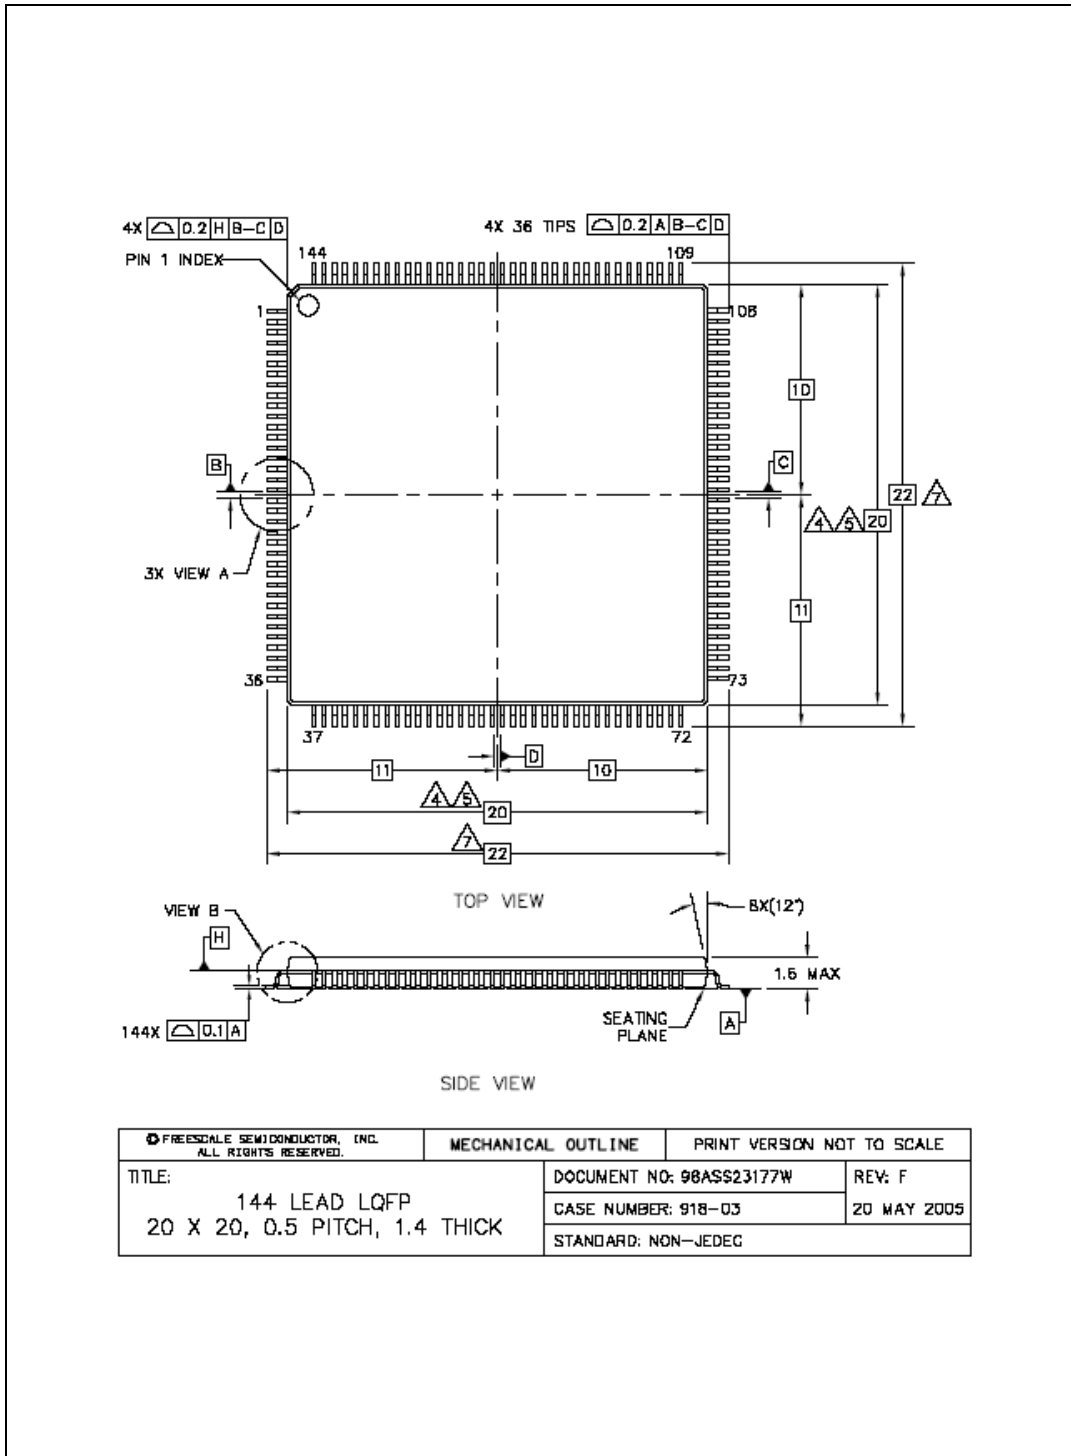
144 LQFP package mechanical drawing (Part 1 of 2)
